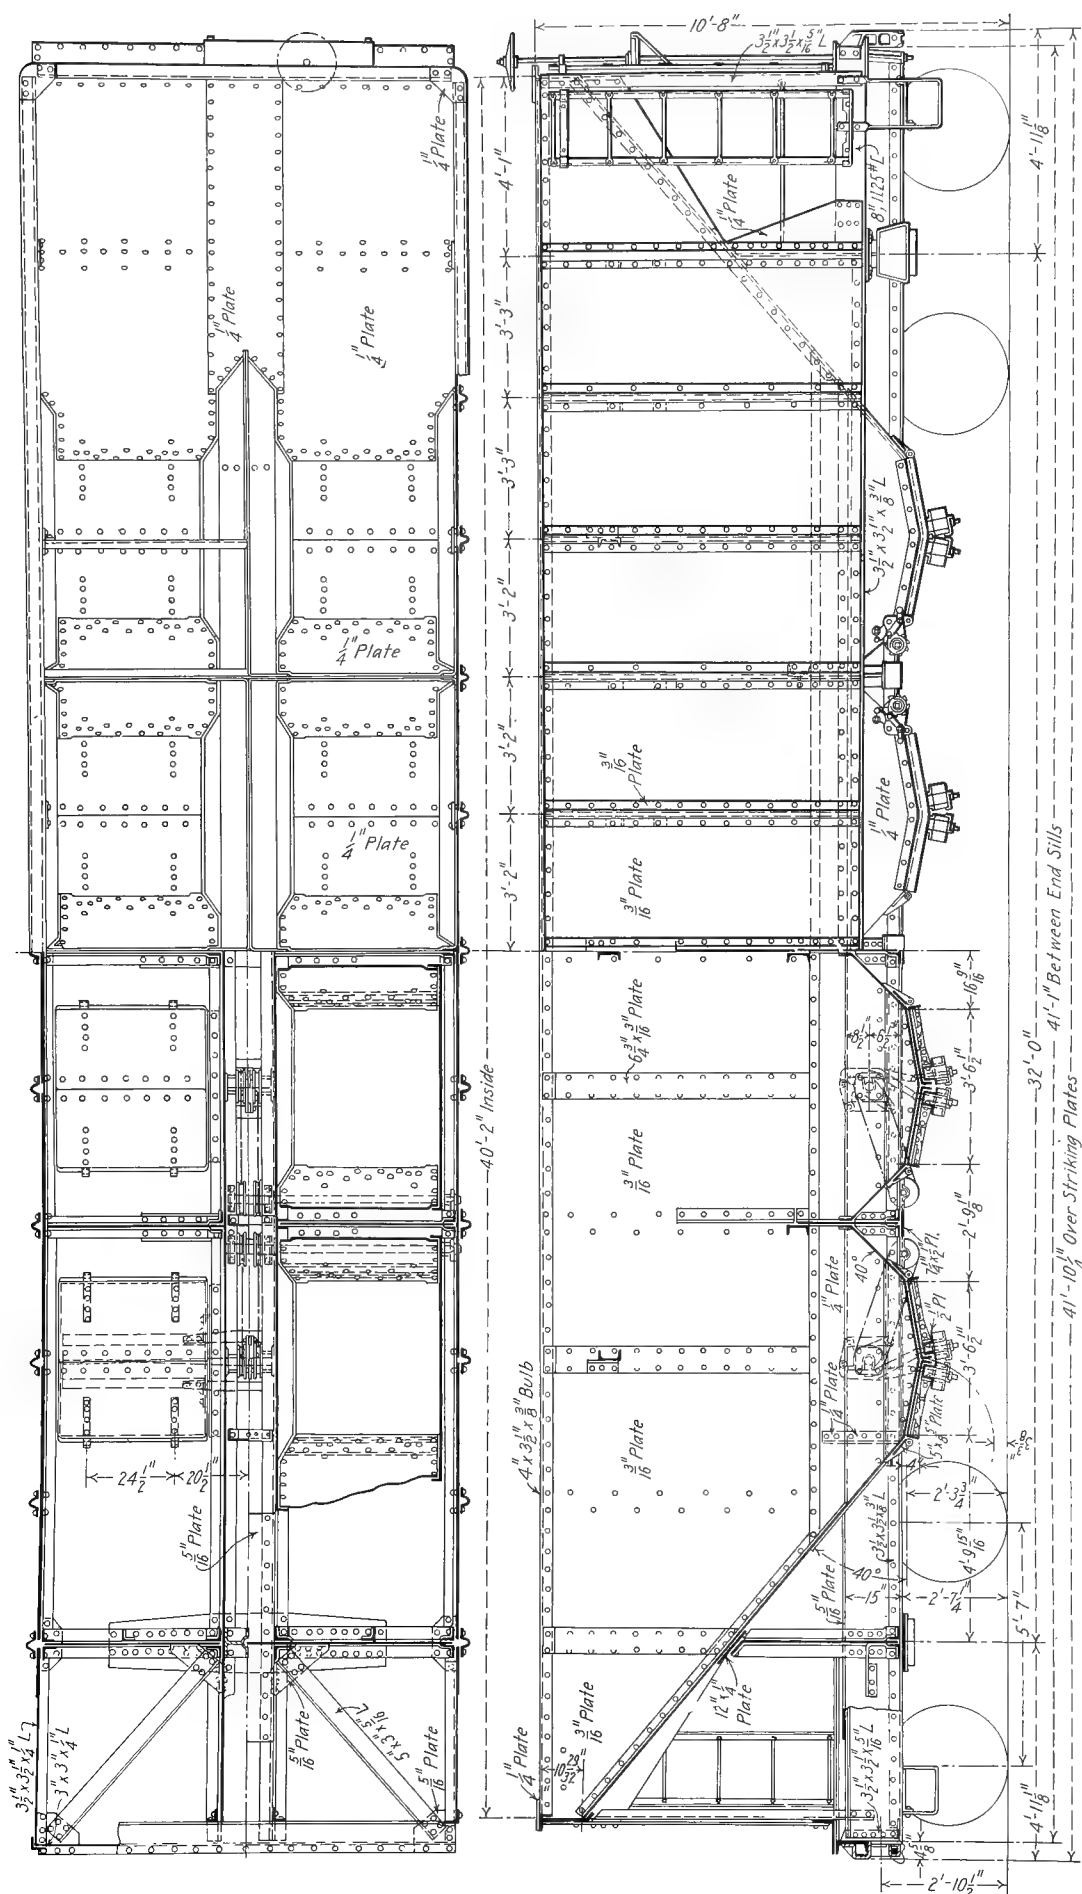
All-Steel 70-Ton Capacity Hopper Car with 40-Deg. Floor Slopes. Builder, Enterprise Railway Equipment Co.
